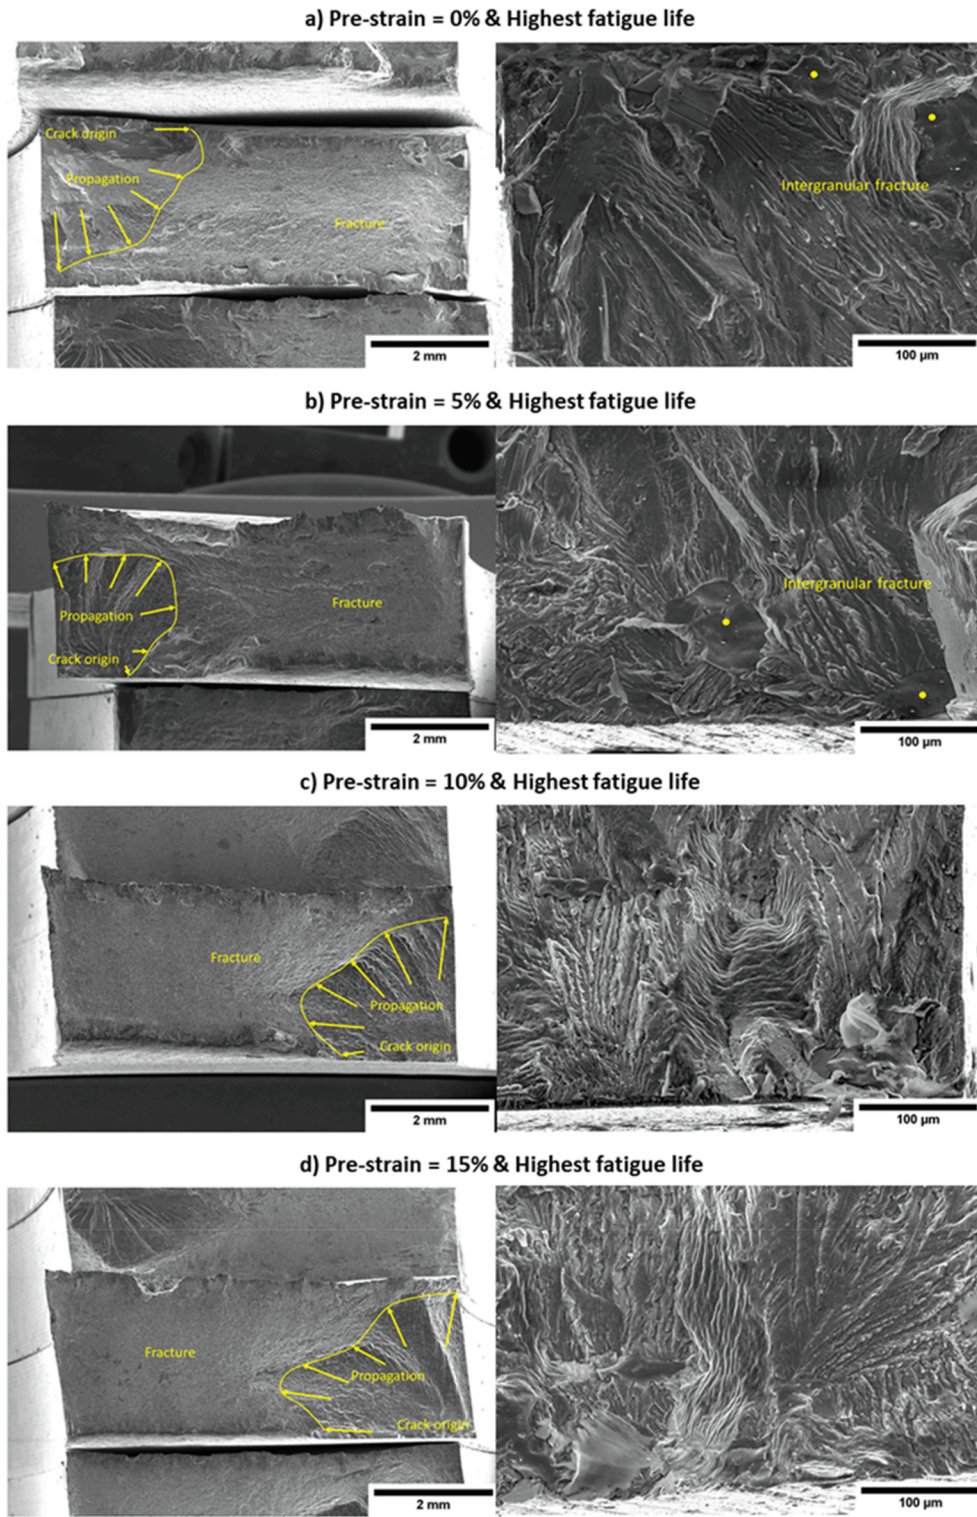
Fracture surfaces of fatigue specimens (highest fatigue life) observed by SEM.
